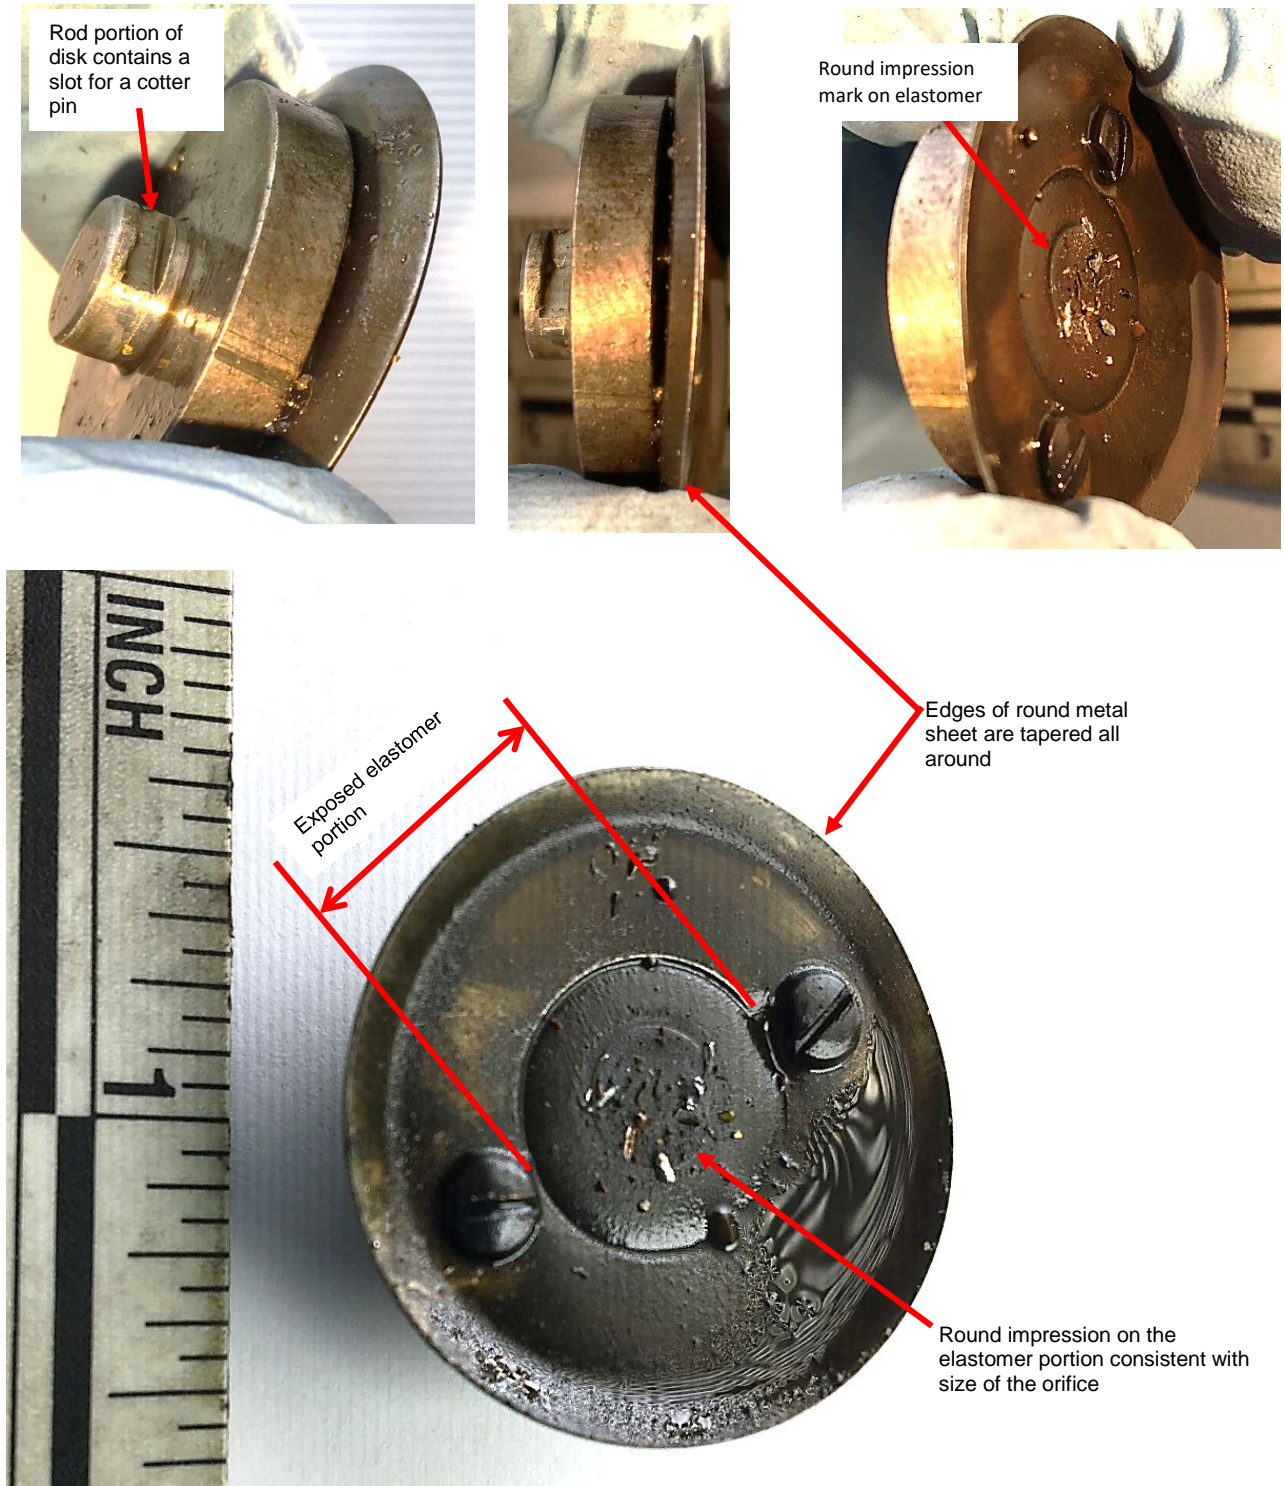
Various views of the disassembled disc from gas regulator assembly #1.
